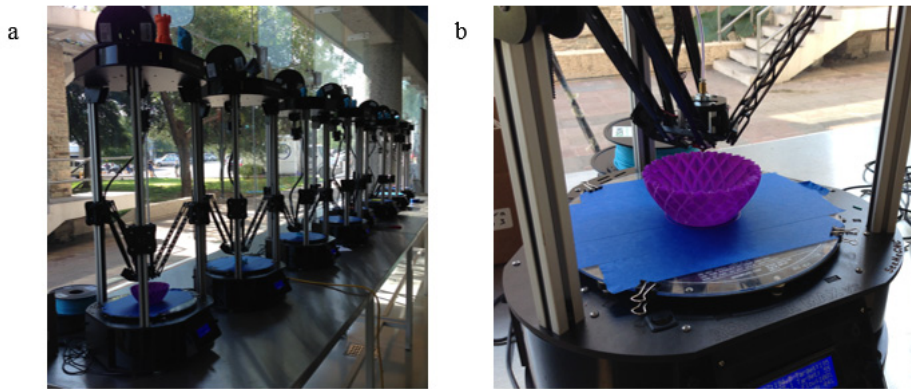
(a) Rostock Max Delta 3D Printers (b) example of a 3D printed part
